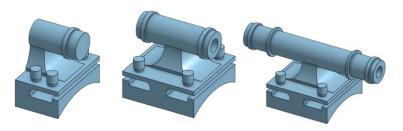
3D CAD model of Blocker (left), Connector IP joint (Middle), Connector MP joint (Right)
